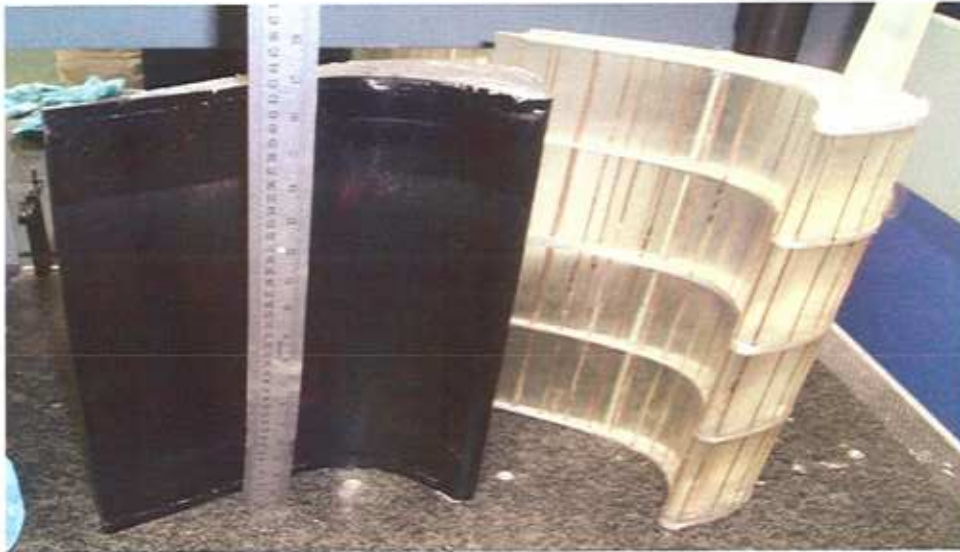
Master for Vacuum casting and Clear Taped blade
